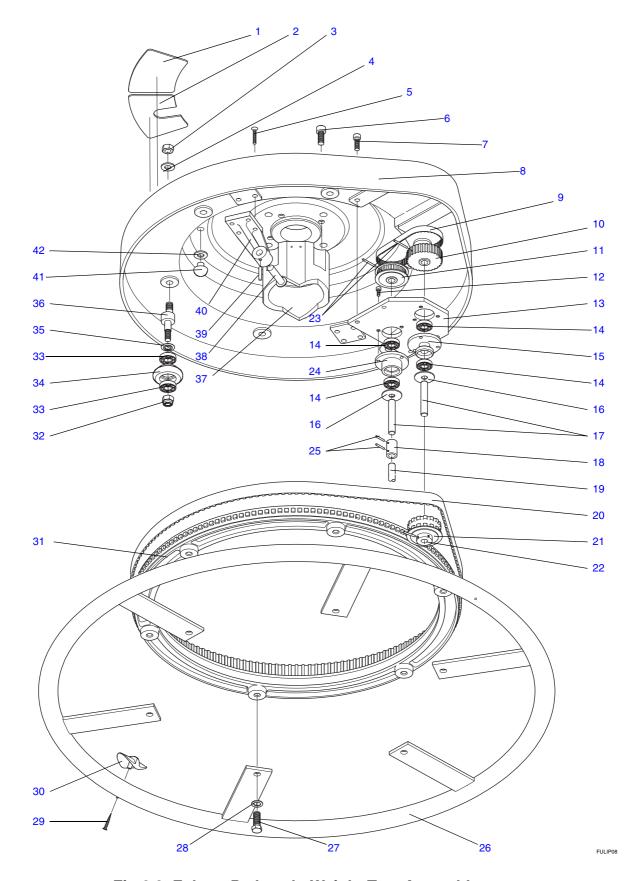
Fulmar Pedestal - Weight Tray Assembly
